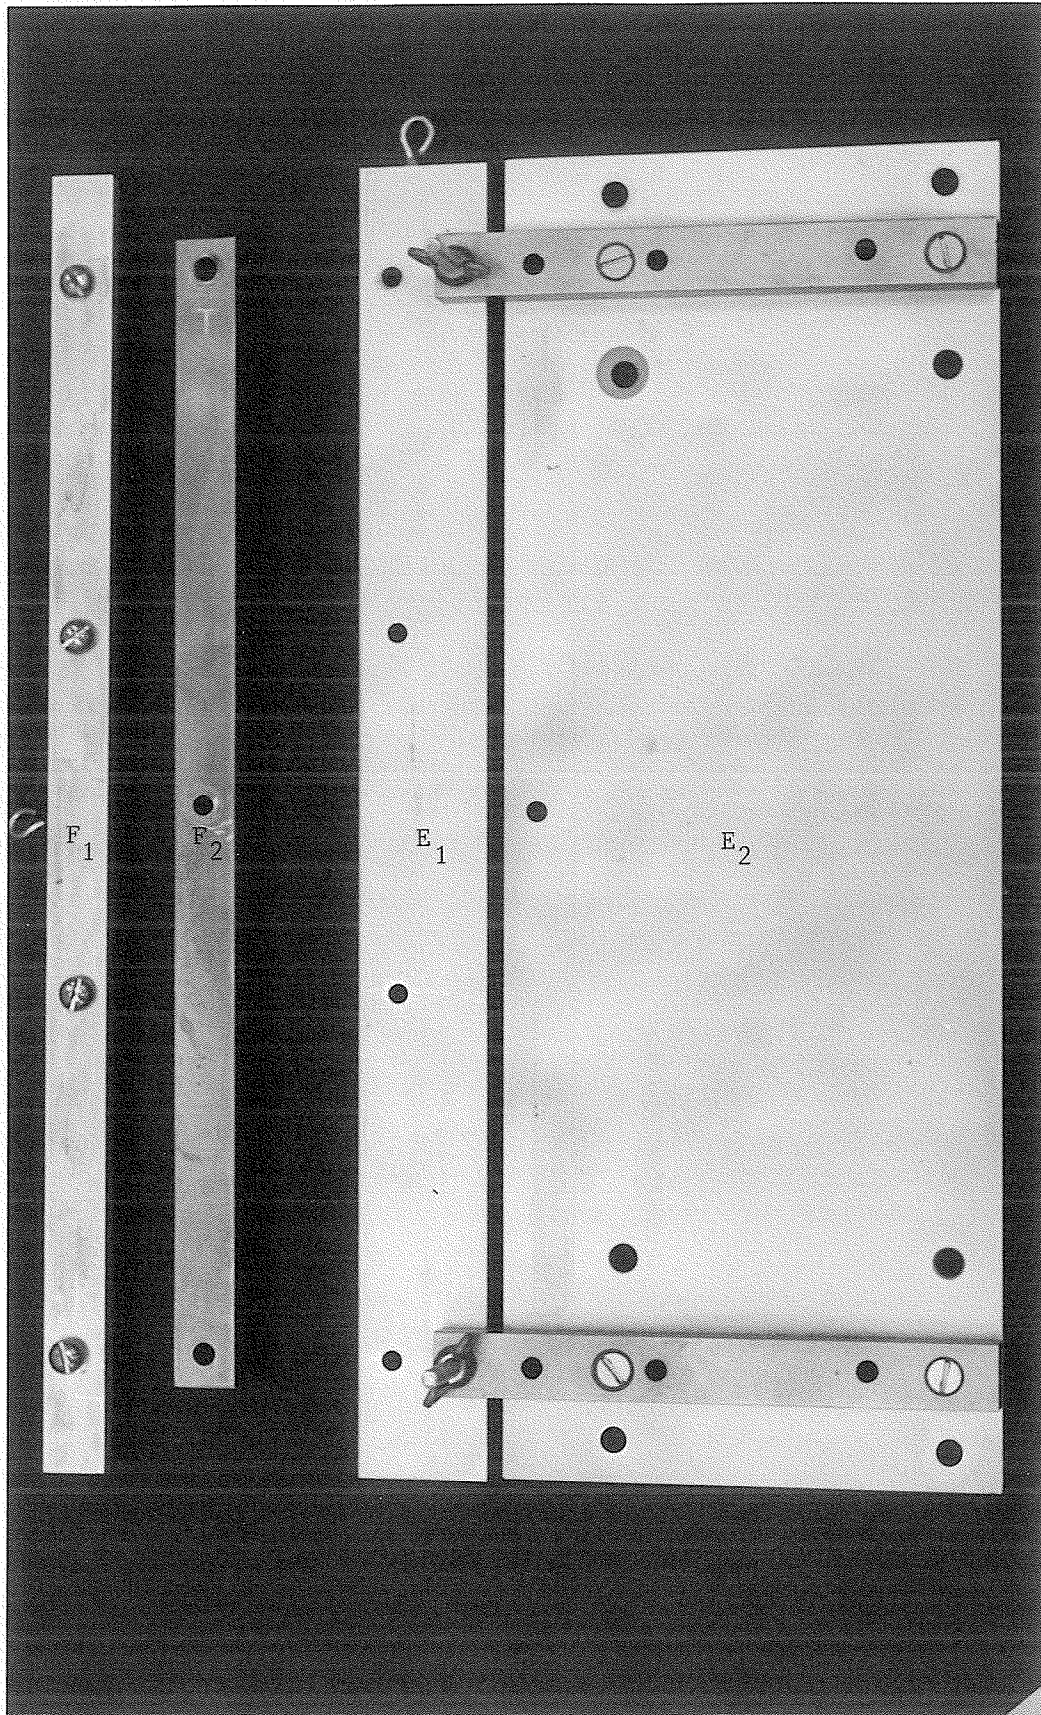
PLATE II: The mounting frame: E_1 and E_2 -plates, F_1 and F_2 -clamps.
